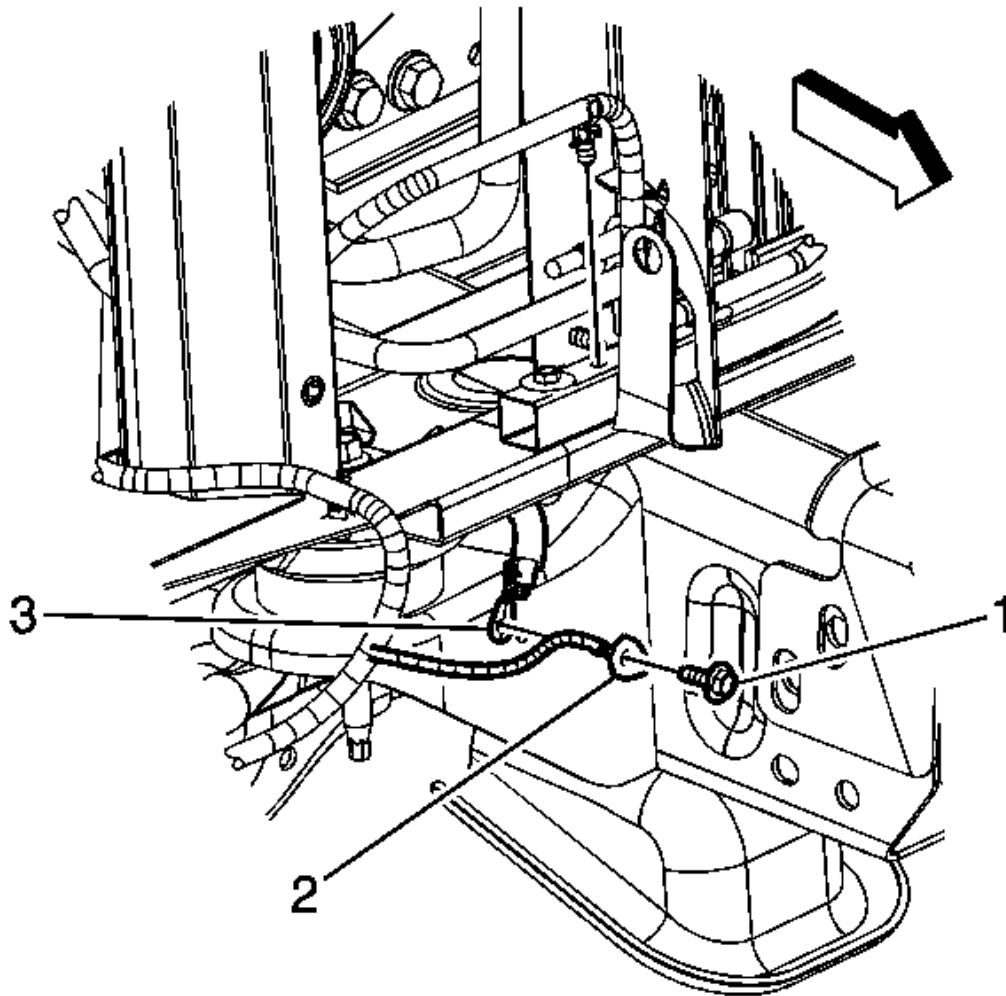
View Of Negative Battery Cable Terminal, Forward Lamp Wiring Harness Terminal & Ground Bolt
